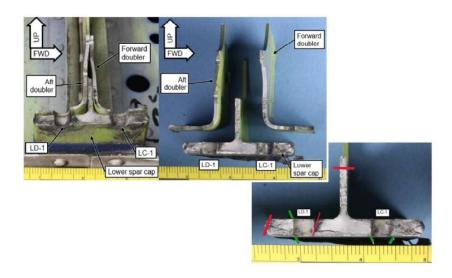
Photographs of the pieces of the left-wing main spar lower cap and doublers before (left) and after (right) sectioning. Close view of the fracture surface (Smaller Photograph) From NTSB report ERA18FA120 (2018).
